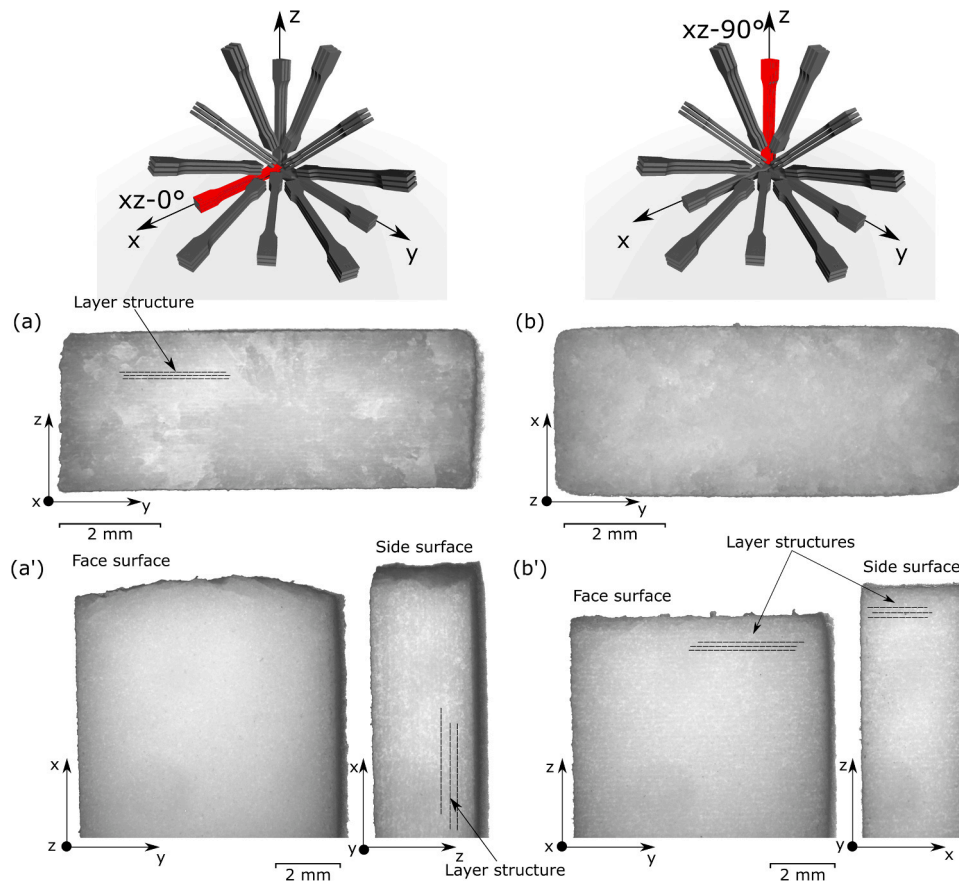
Fracture surfaces of the $xz-0^\circ$ (a) and $xz-90^\circ$ (b) neat specimens and the face and side views of their fracture edges (a', b').
